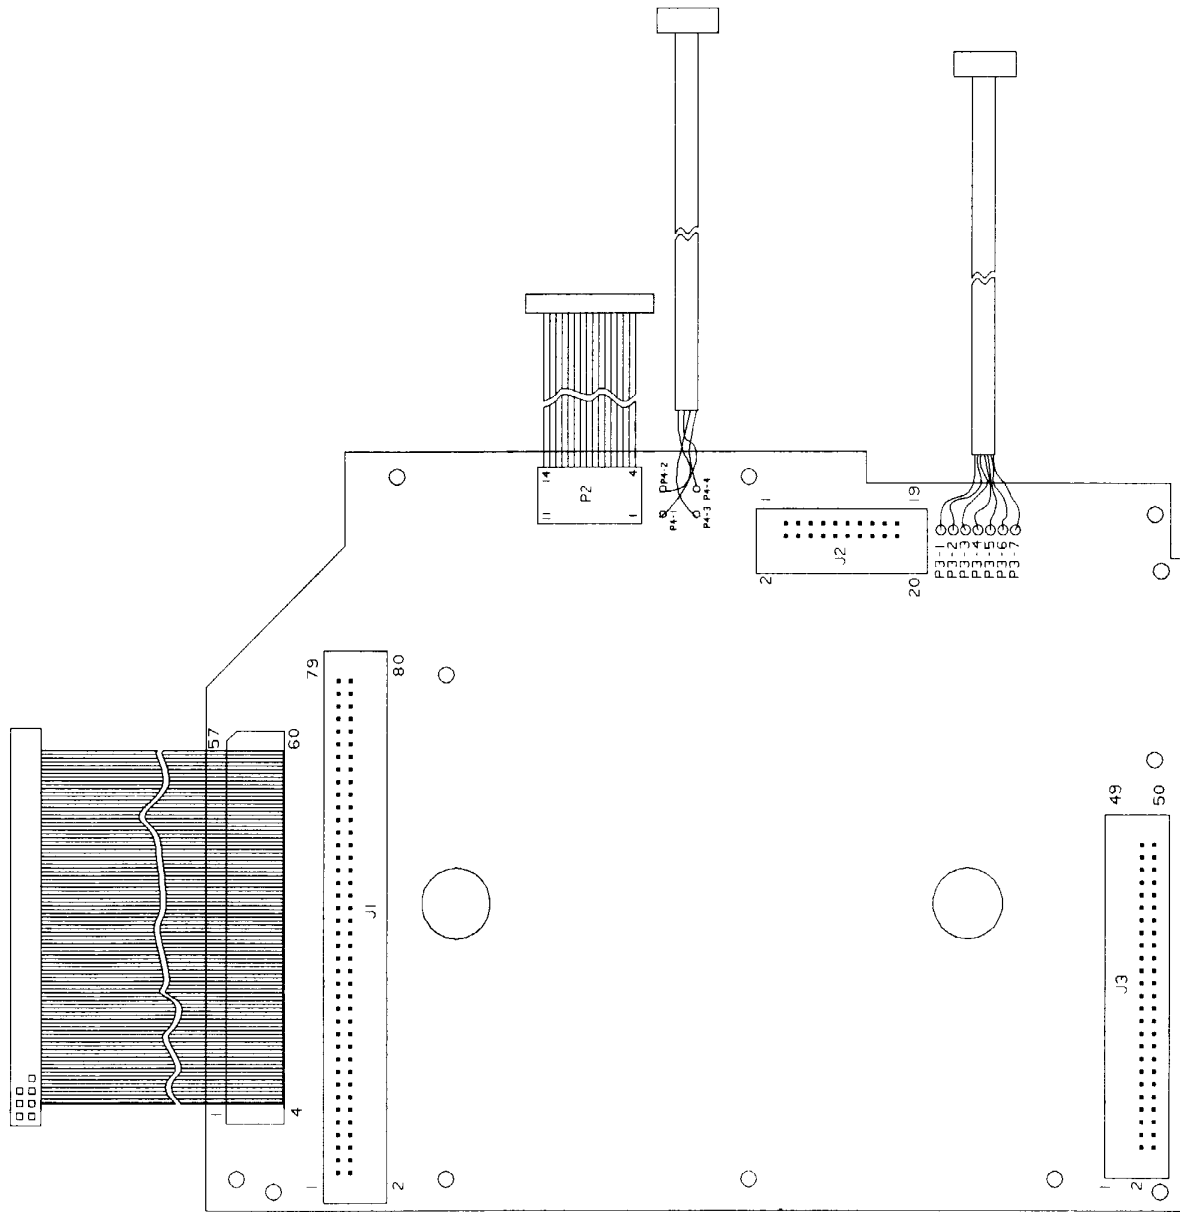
A2 Interconnect PWB Assembly (10208-1270) Component Locations
